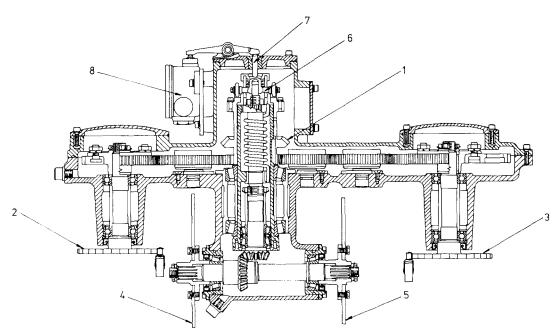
FAN-SHAPED SHIFTER GEARBOX
